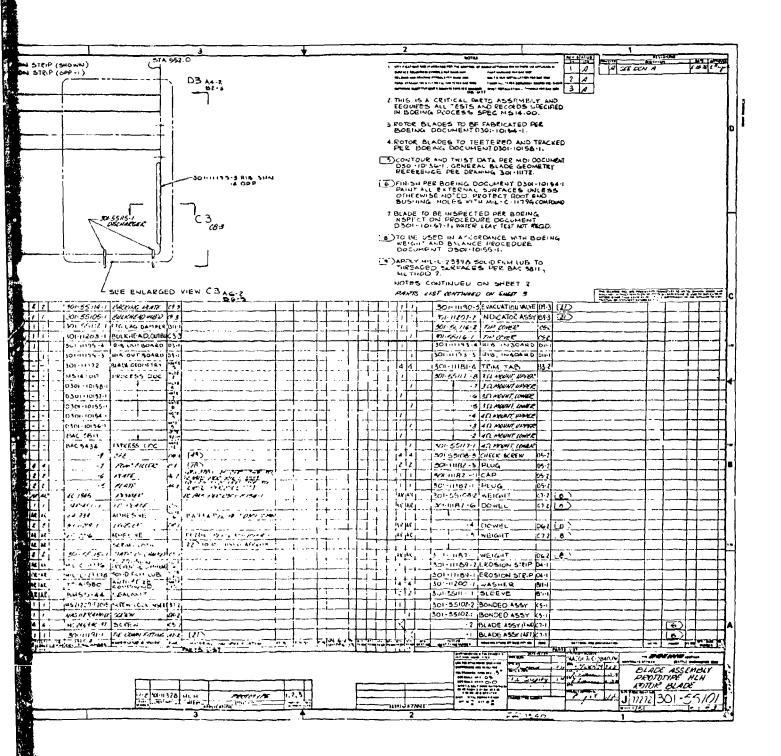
Blade Assembly Prototype HLH Rotor Blade
